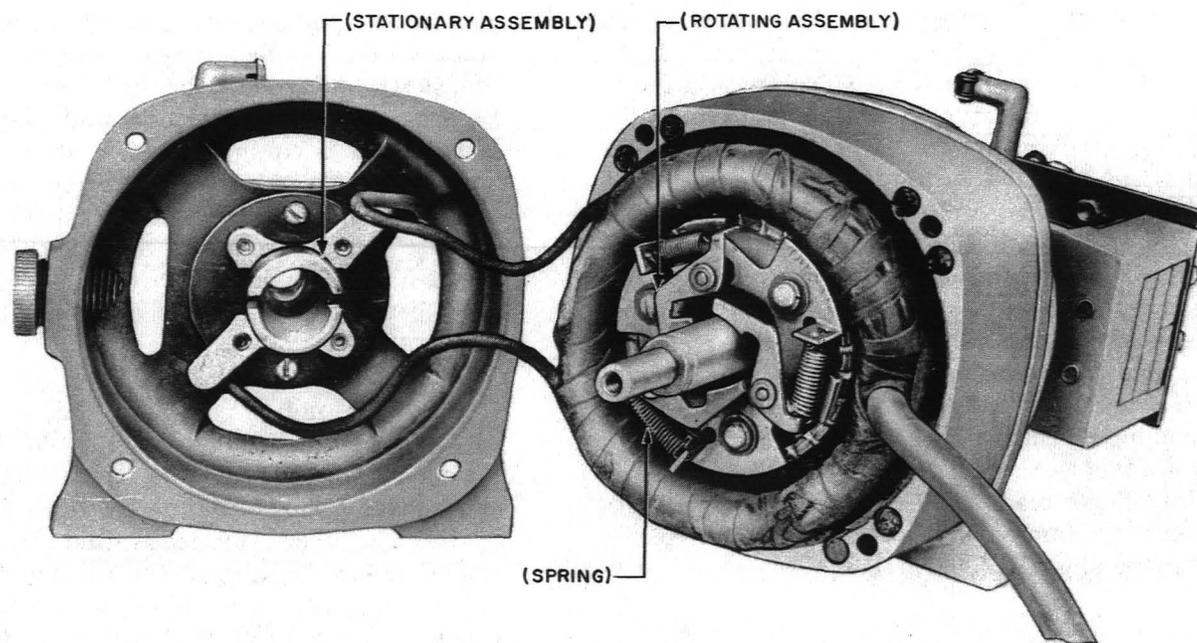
KS-5472 — AC Motor-driven 1000-Cycle Machine
